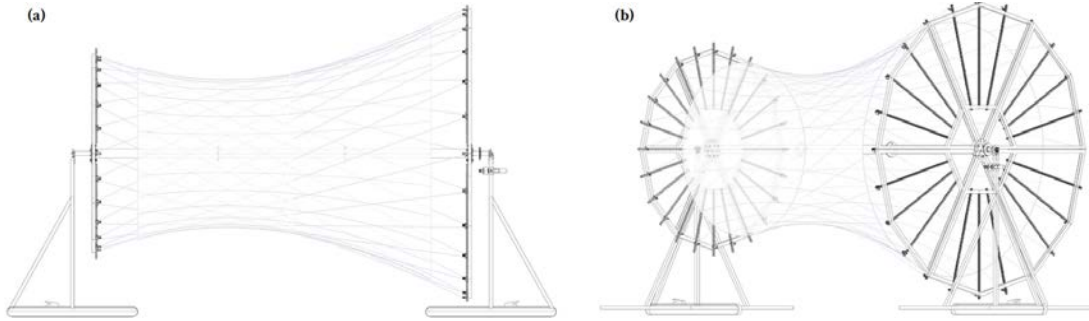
CAD Model of the final prototype platform, 5 m x 5 m x 9.5 m (a) 45° view (b) side view.
